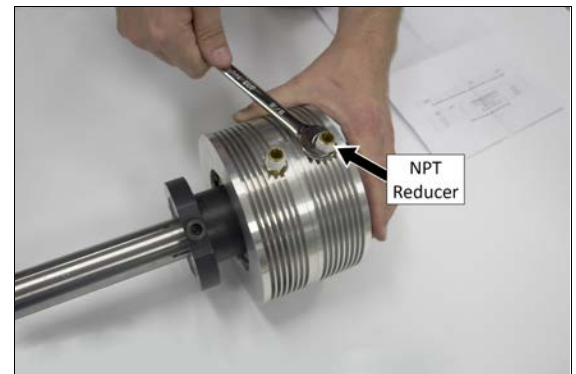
NPT reducers installed on the pneumatic cylinder.
